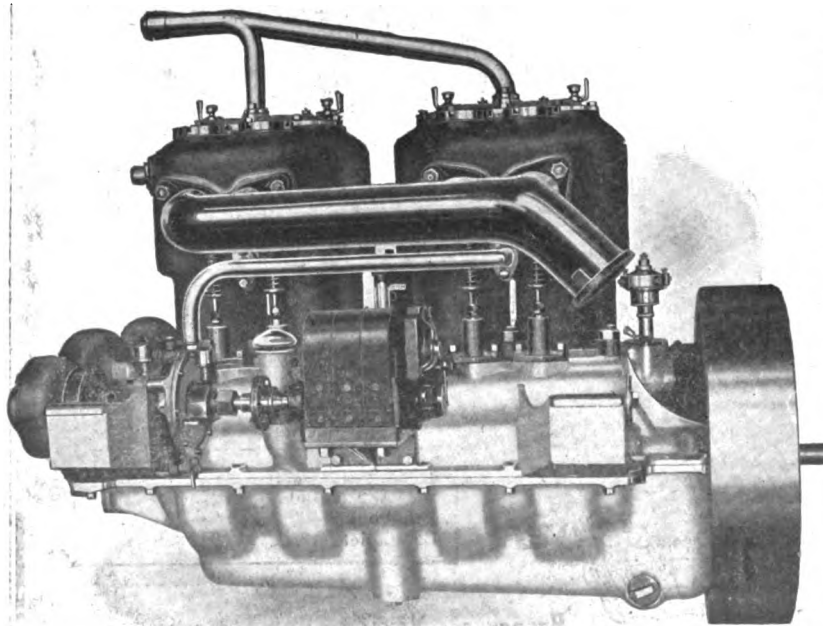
Exhaust side of motor, showing pump, magneto and exhaust manifold
